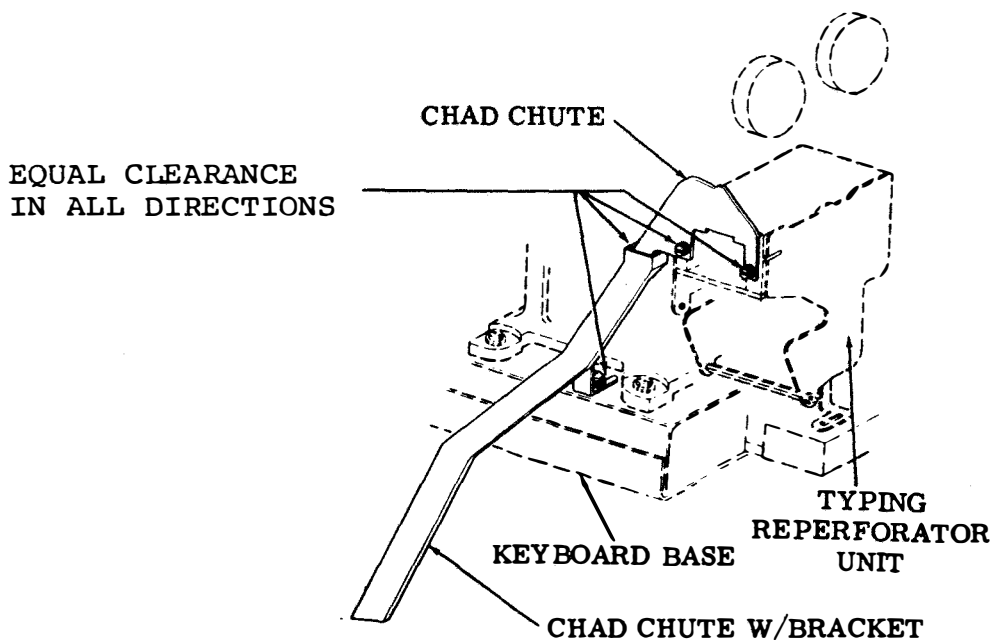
Chad Chute Assembly for Keyboard Typing Reperforator, Left Side View
